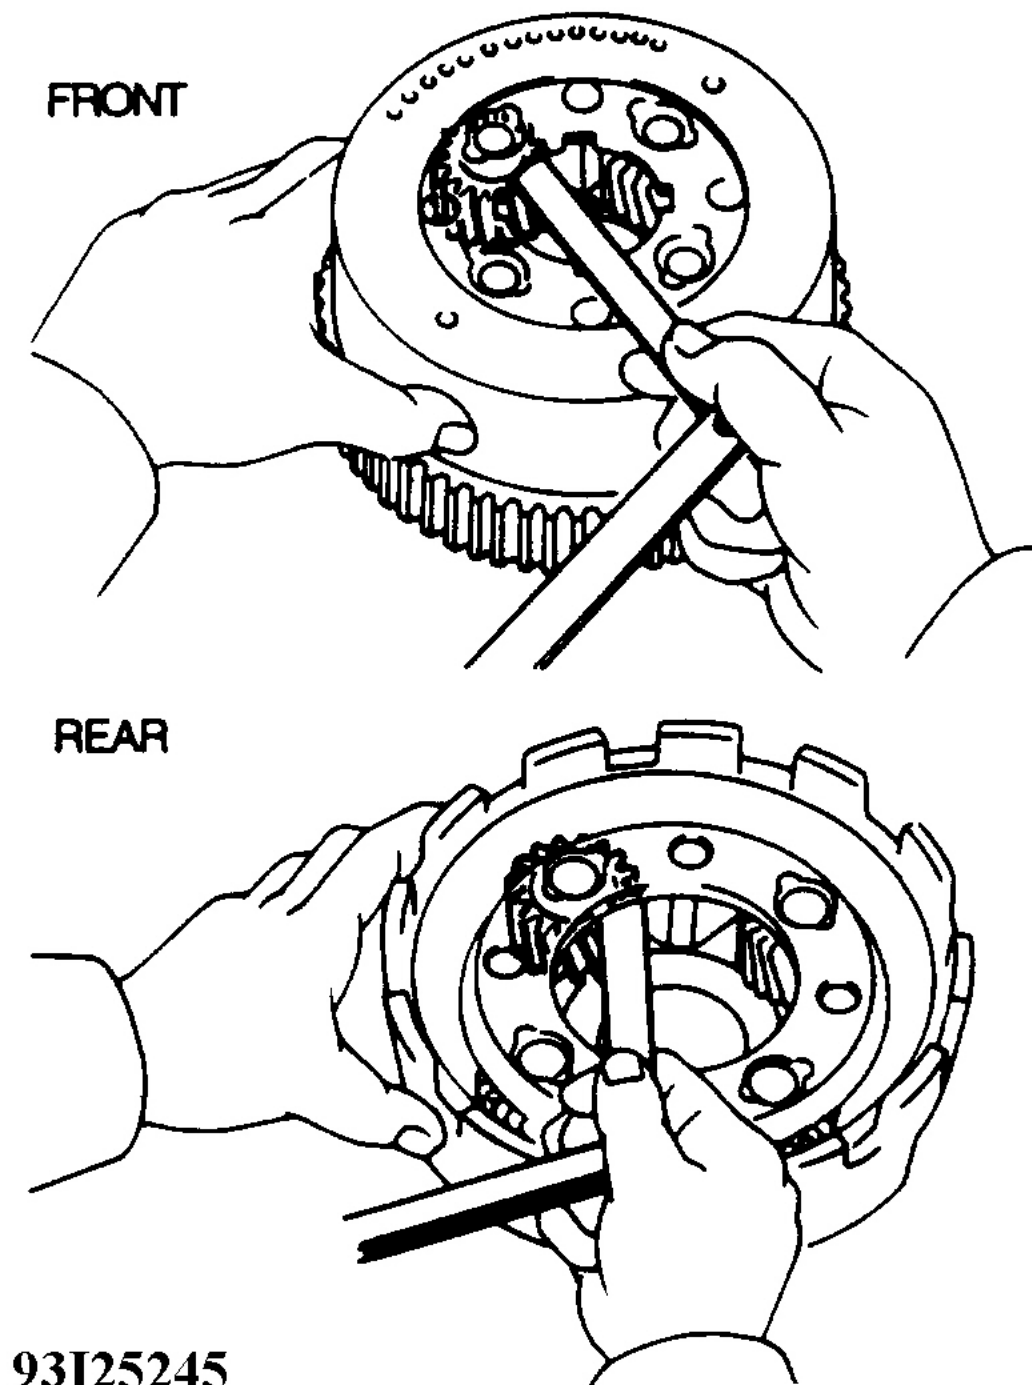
Measuring Planetary Pinion Gear Thrust Clearance
